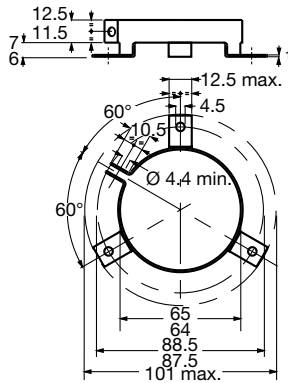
Dimensional outline of clamp for case Ø D = 65 mm
